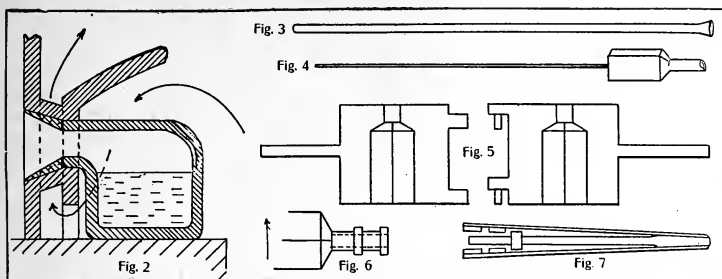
Single Pot in Pot Furnace. Fig. 3--Blower's Pipe. Fig. 4--Holder for Hot Bottles. Fig. 5--Die. Fig. 6--Neck of Bottle. Fig. 7--Tongs for Shaping Neck.
